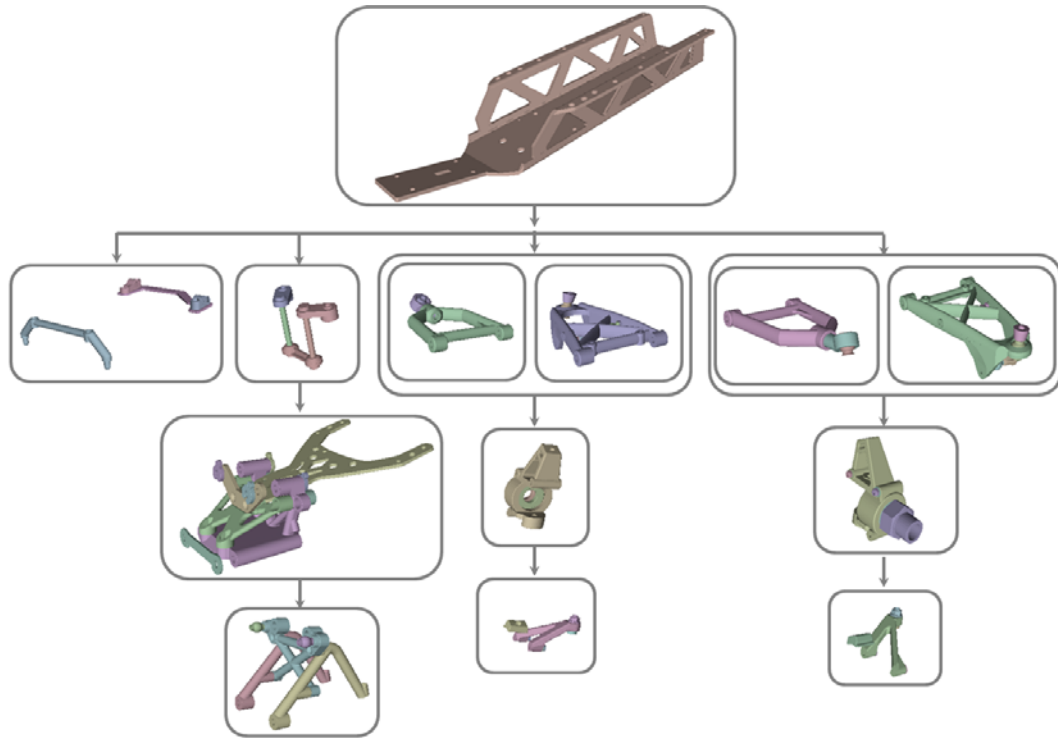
Disassembly layer generation for the 73-part chassis assembly by combining motion planning and part interaction cluster detection methods.
